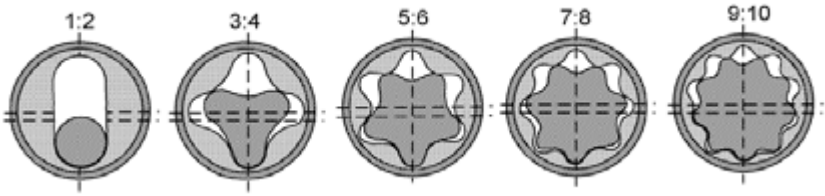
Different lobe configurations for the progressive helical lobe positive displacement motors.
